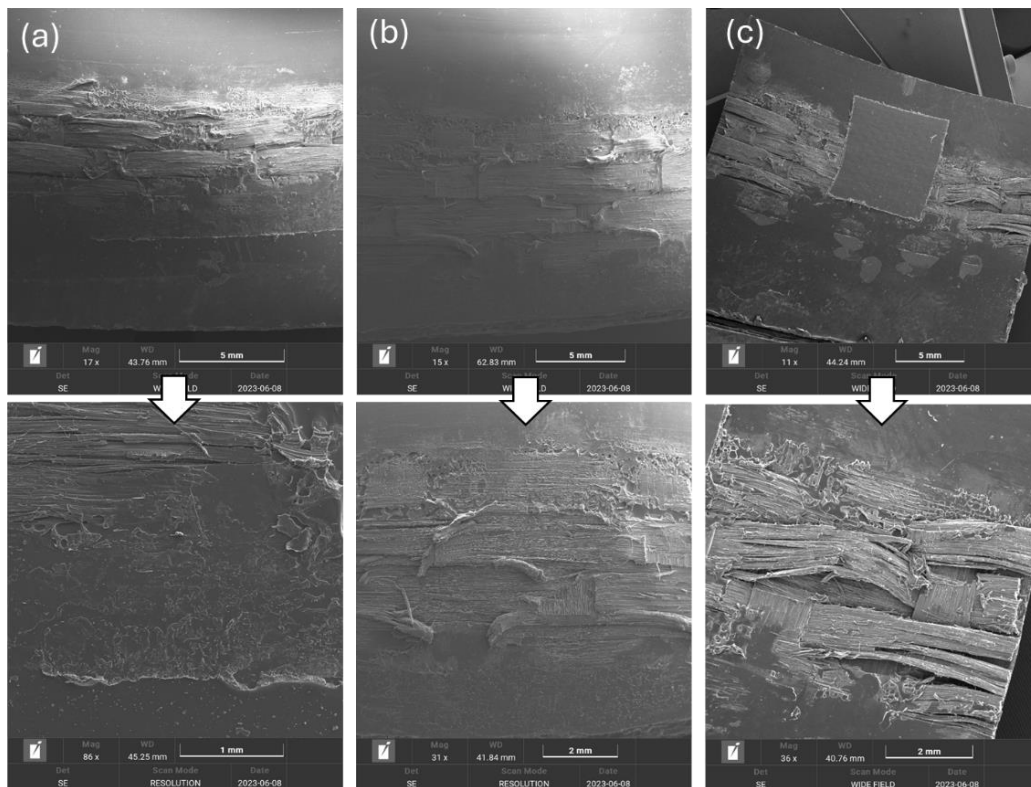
SEM micrographs of fracture surfaces for (a) Set-up 1, (b) Set-up 2, and (c) Set-up 1-DEF thermoplastic induction welded joints after fatigue lap shear tests.
